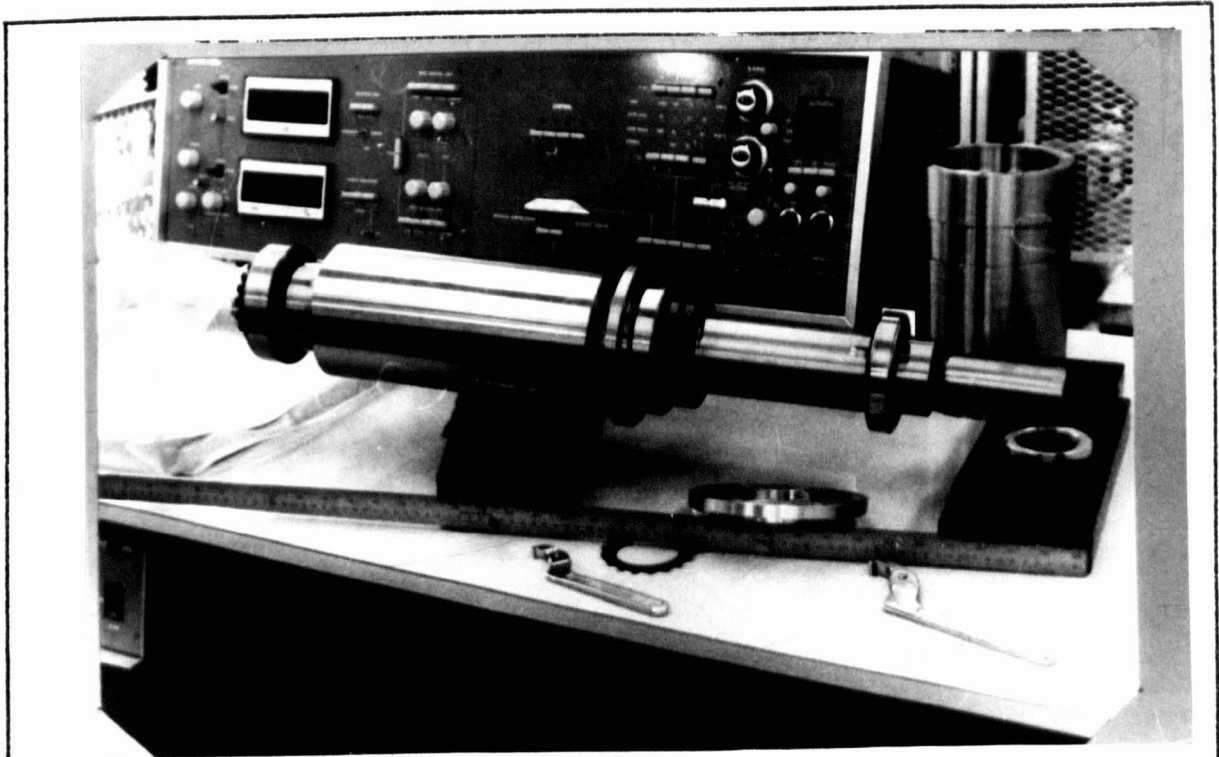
TEST SHAFT WITH MOUNTED ROLLING ELEMENTS.
